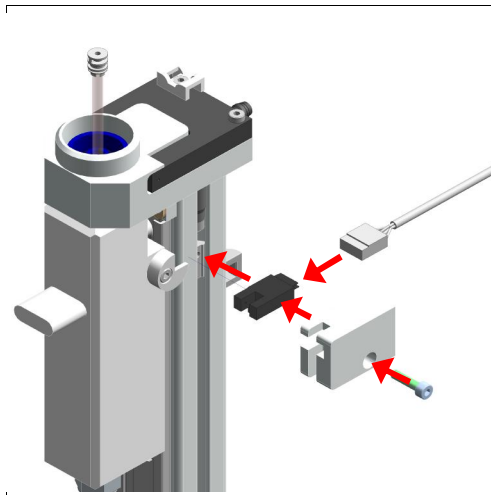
Connecting the Sensors at the HAND SLIDER UNIT
